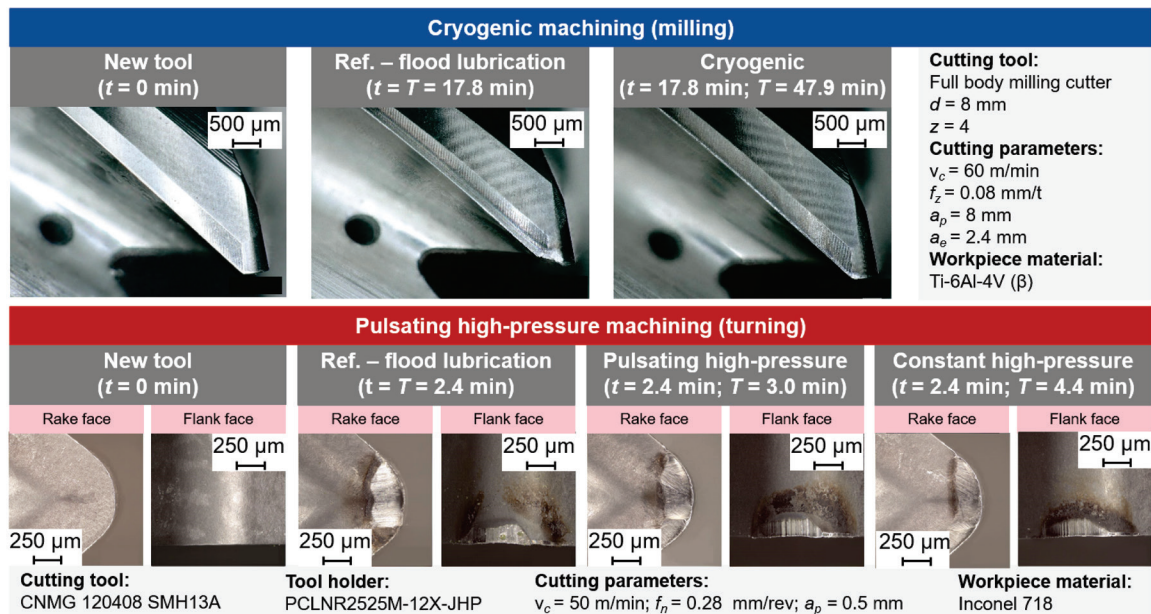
Tool wear in cryogenic machining and pulsating HPJAM (t - time; T - tool life)
